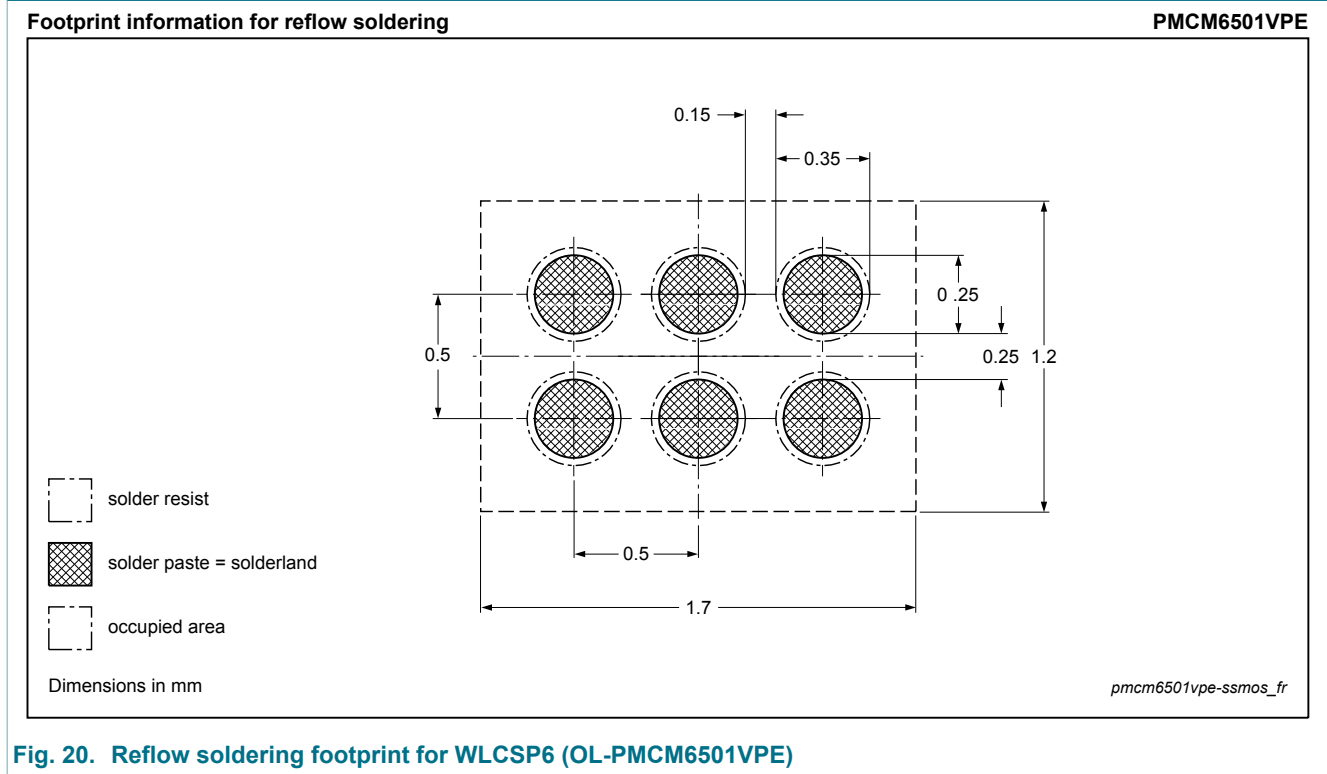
Reflow soldering footprint for WLCSP6 (OL-PMCM6501VPE)
